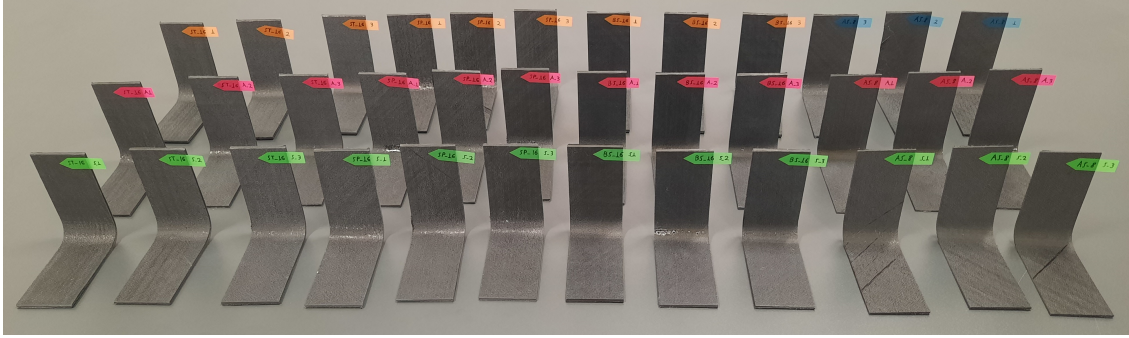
Specimens of the laminate designs manufactured from all available tools. From front to back: Parts manufactured from the steel, aluminum and INVAR tool respectively.
